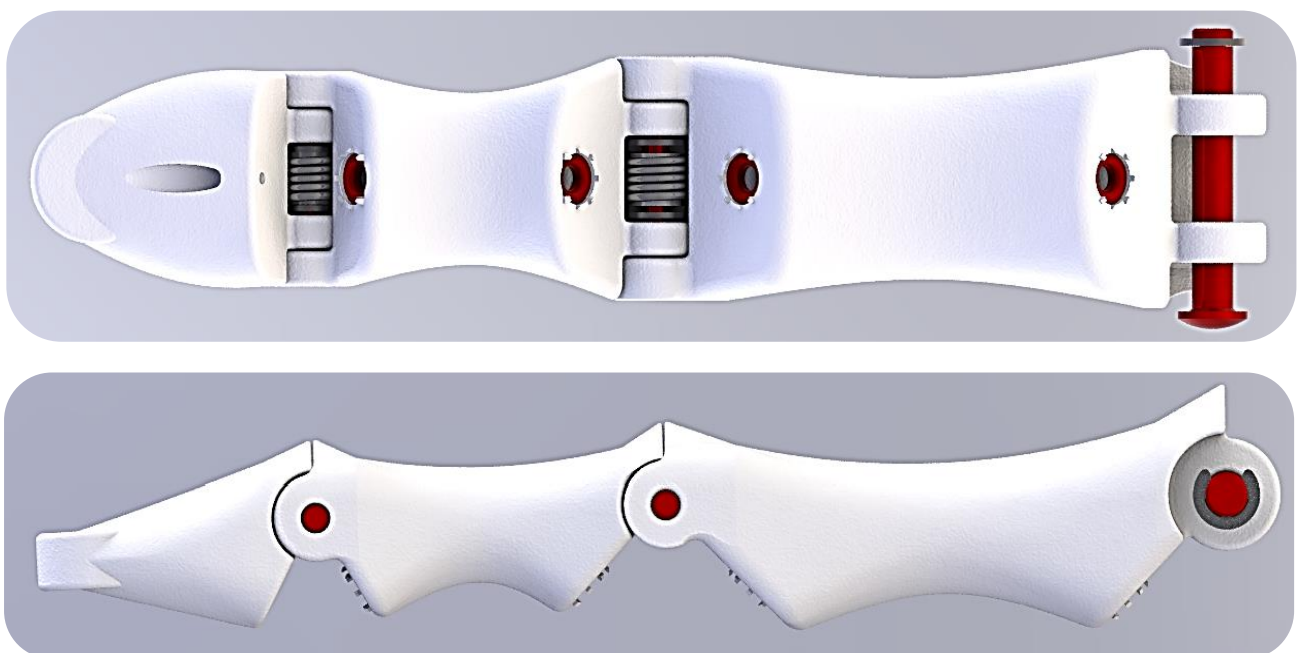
Inferior and lateral views of an assembled digit; top and bottom respectively.
